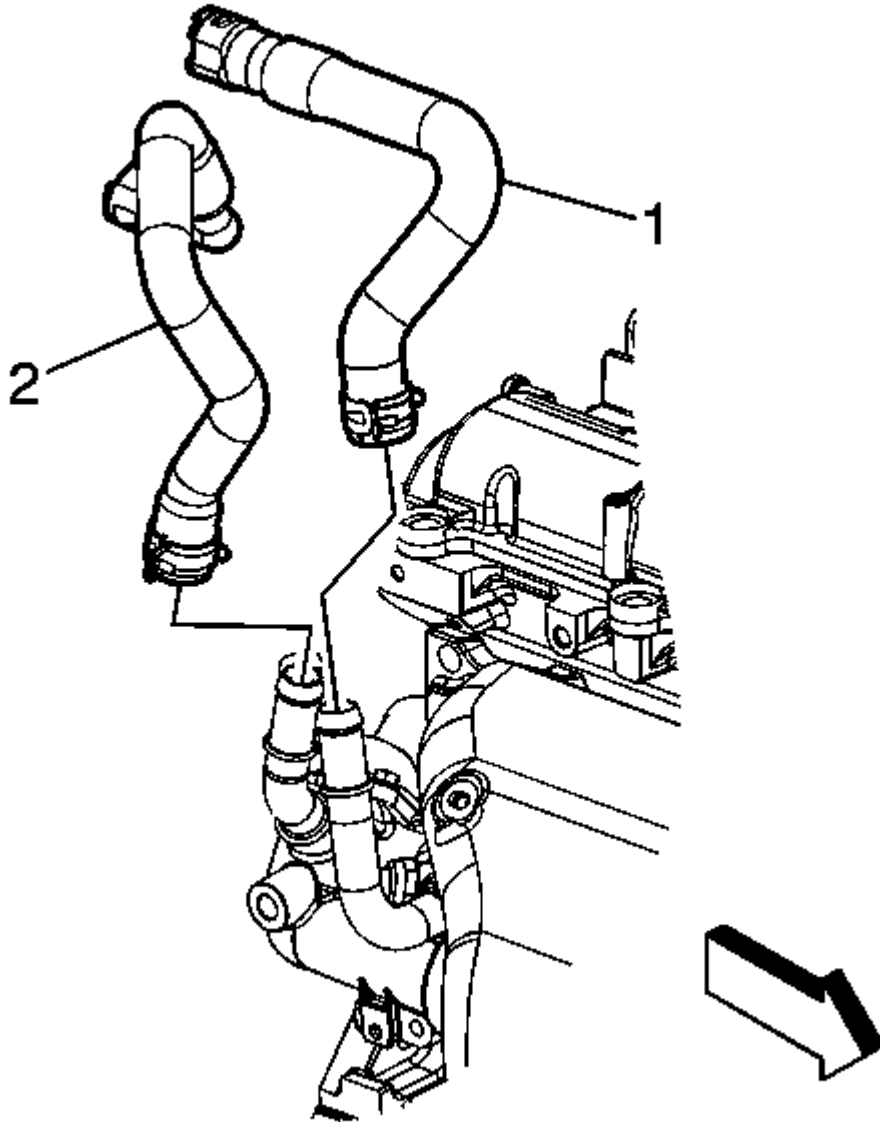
Identifying Heater Inlet & Outlet Hoses
